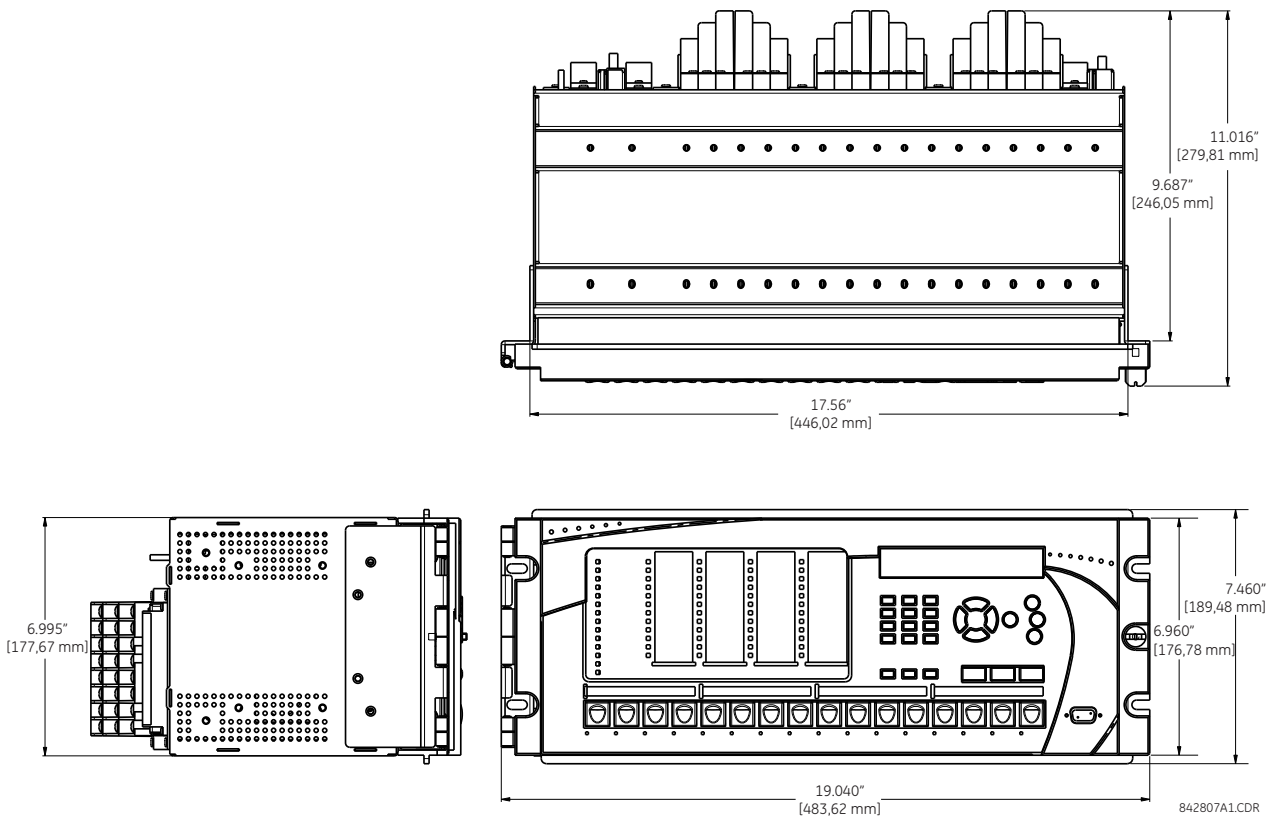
Horizontal dimensions (Rev. 2 enhanced front panel)
